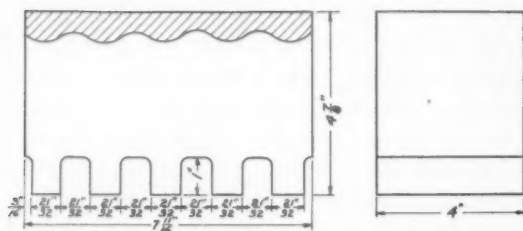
TEST COUPON MADE WITH OPEN RISER.
